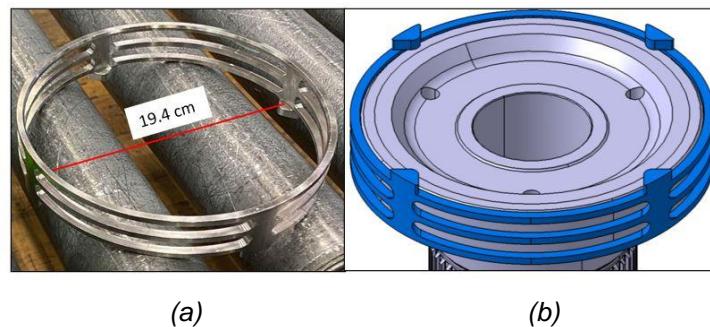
Gear protector a) The physical part manufactured by milling b) The CAD model of the same tool, showing how it surrounds the gear
